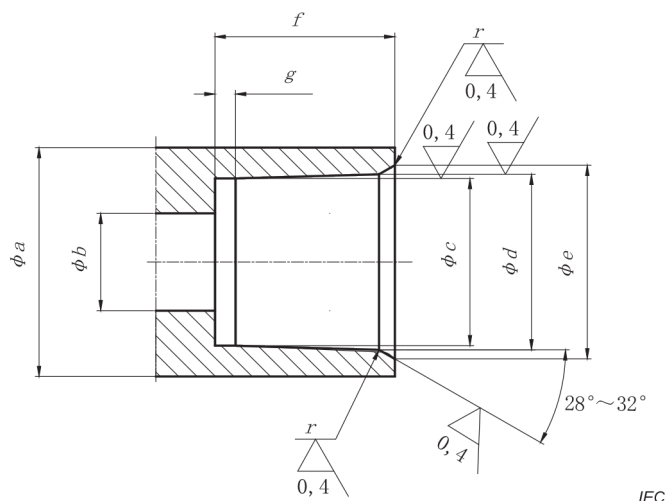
Gauge for outer contact of connector with pin centre contact (for dimensions, see Table 4)
